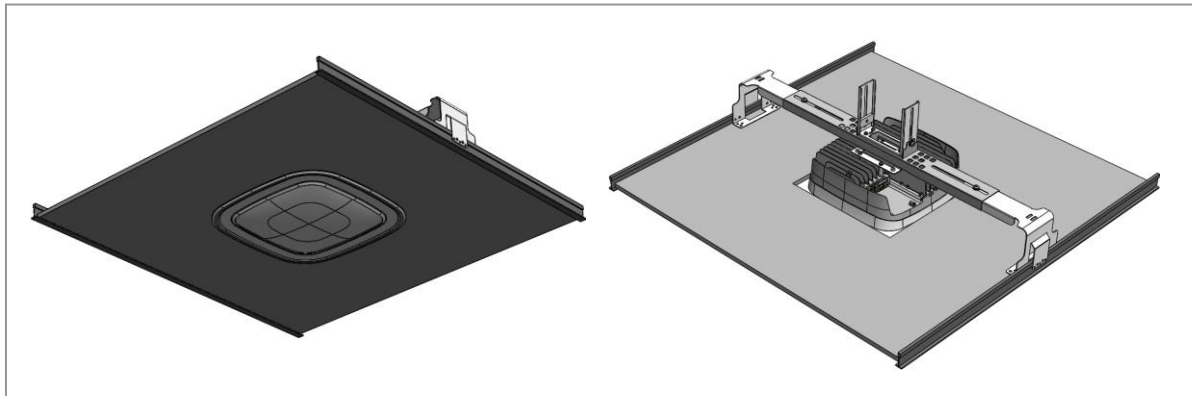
Fixing Ceiling Mount Kit Assembly to Building Structure
